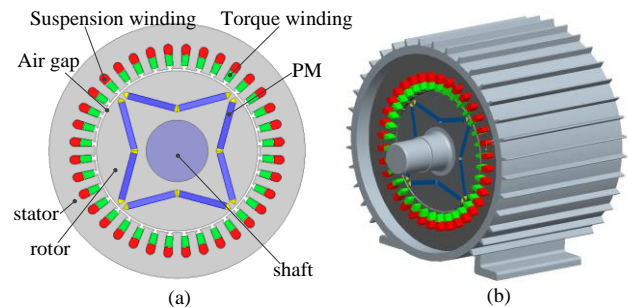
Proposed bearingless machine. (a) Front view. (b) Side view.
